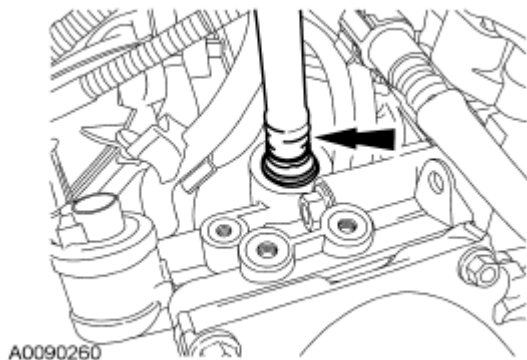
Locating Vacuum Supply Tube & Position Aside
